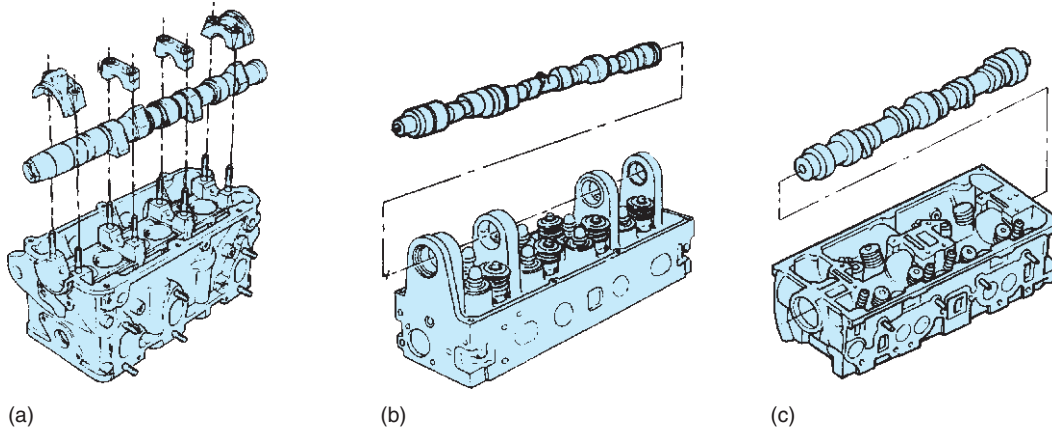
Overhead camshafts may be held in place with (a) bearing caps, (b) supported by towers, or (c) fitted into bearing bores machined directly into the head.
